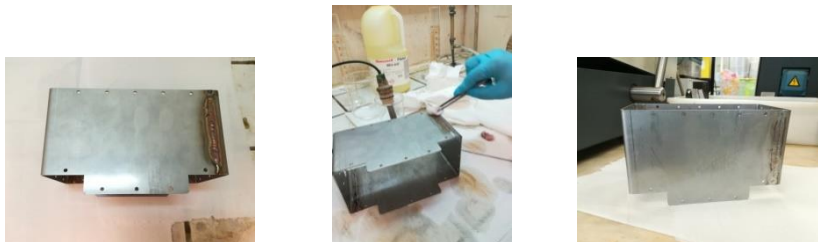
Left: the casing middle frame after being welded. Center: the casing middle frame during the passivation process. Right: the casing middle frame after the passivation process.
